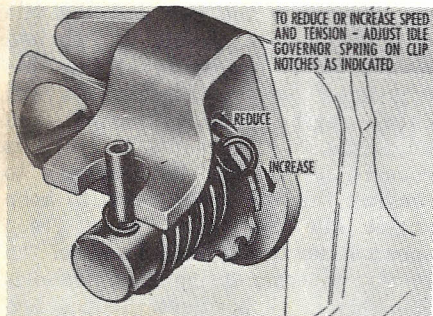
View showing installation of idle governor spring. Later "W" series carburetors do not have governor spring. Adjust spring as shown so engine will idle smoothly in any position.
